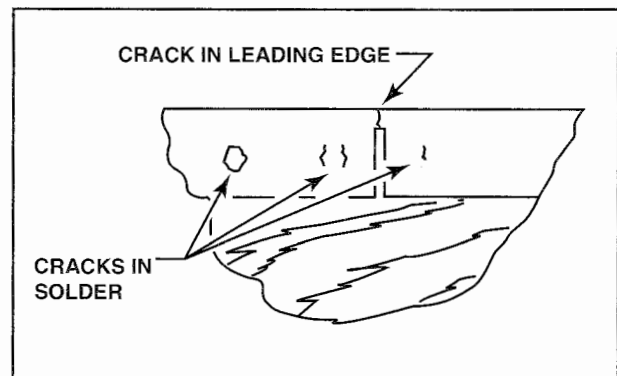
The metal tipping on a wood propeller should be inspected for cracks in the leading edge and in the solder that covers the retaining screws. If you locate a crack, closely inspect the area near the crack.
